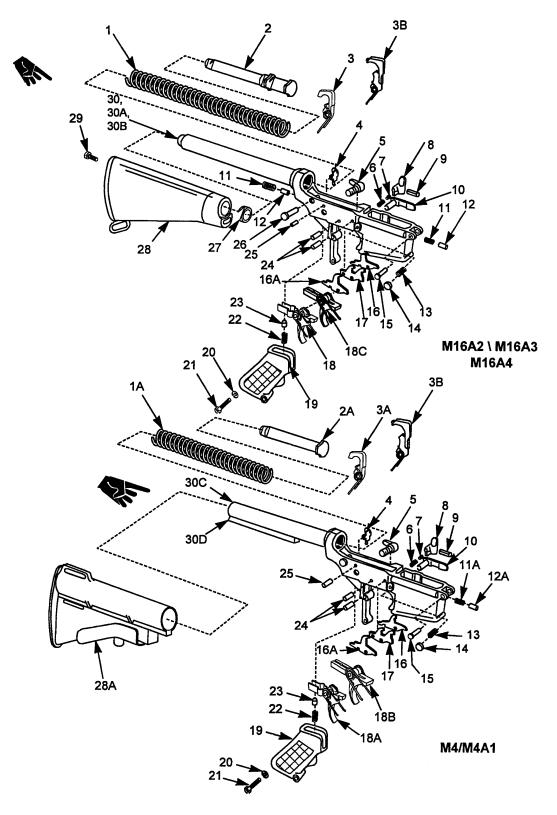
Lower Receiver and Buttstock Assembly (M16A2) 9349100, (M16A3) 12012001, (M16A4) 12598101, (M4) 9390011 and (M4A1) 12972690.
